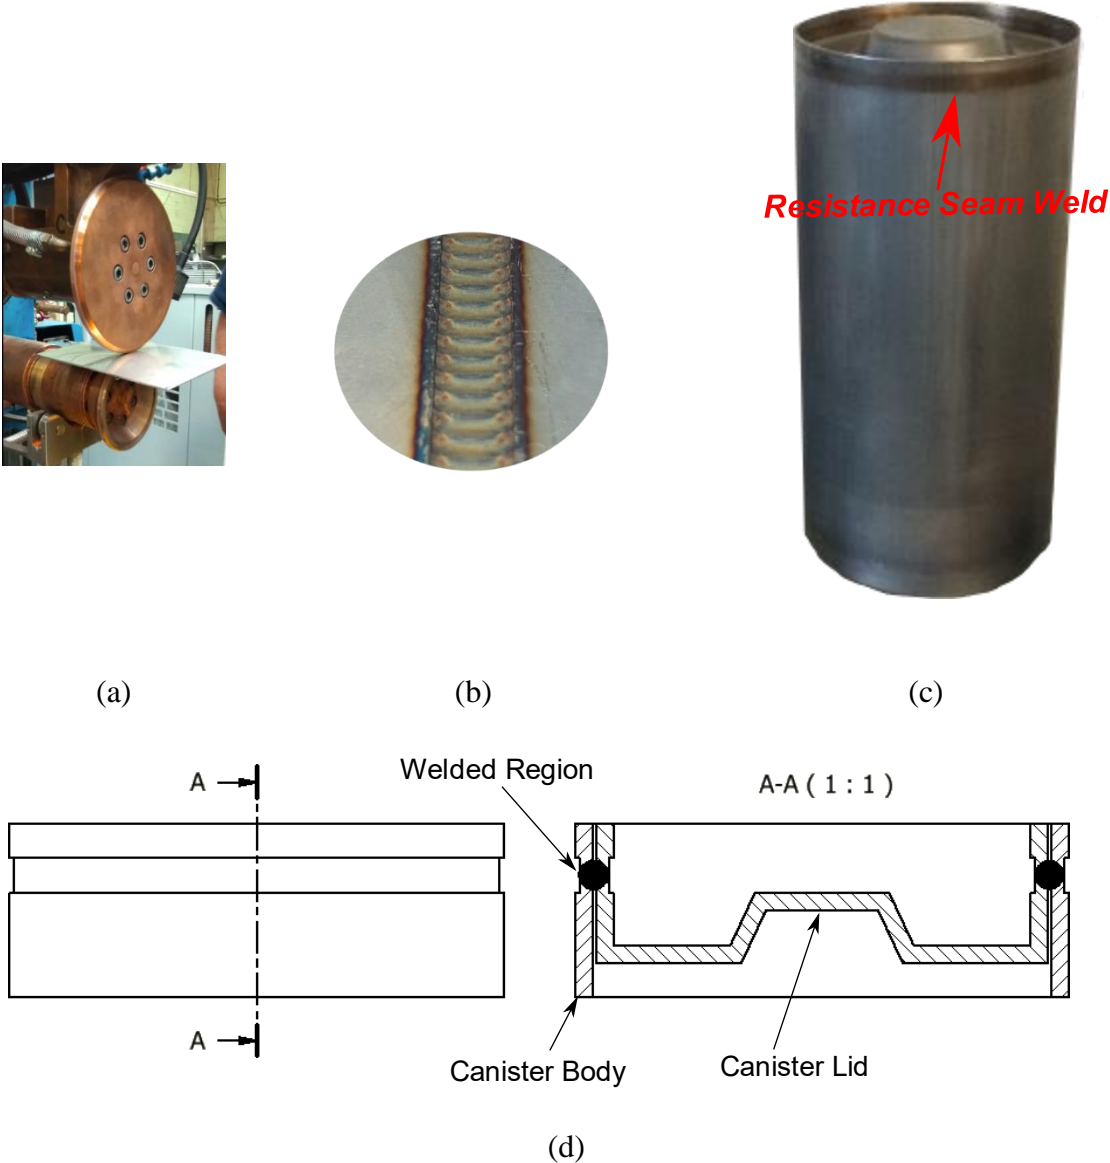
Resistance seam welds (a) Welding process, (b) Close-up of weld structure, (c) Welded cylindrical RSW canister, (d) CAD schematic and cross-sectional view of RSW canister
